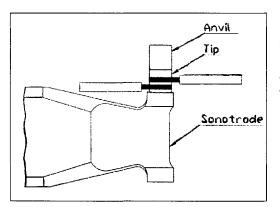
<sup>24</sup>. Key aspects of the ultrasonic welder.
